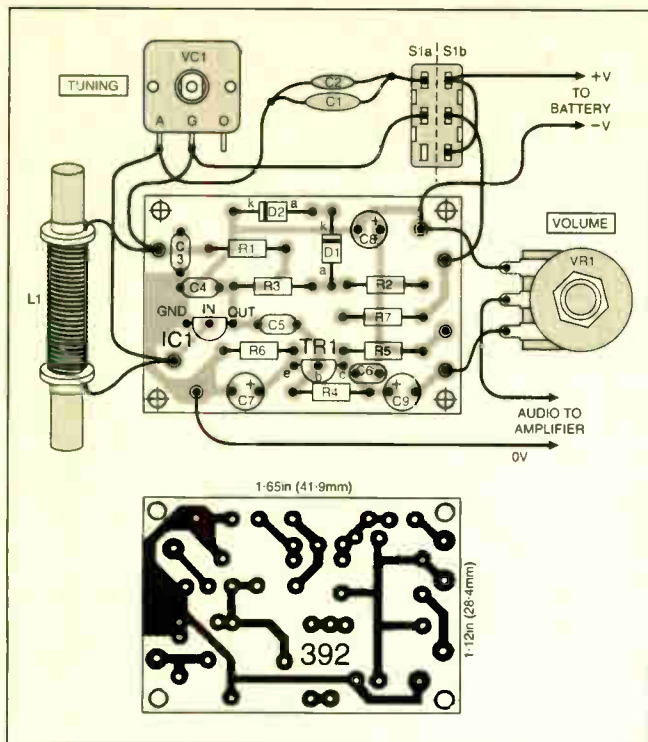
Printed circuit board component layout, interwiring to off-board components and full-size underside board copper track master.
